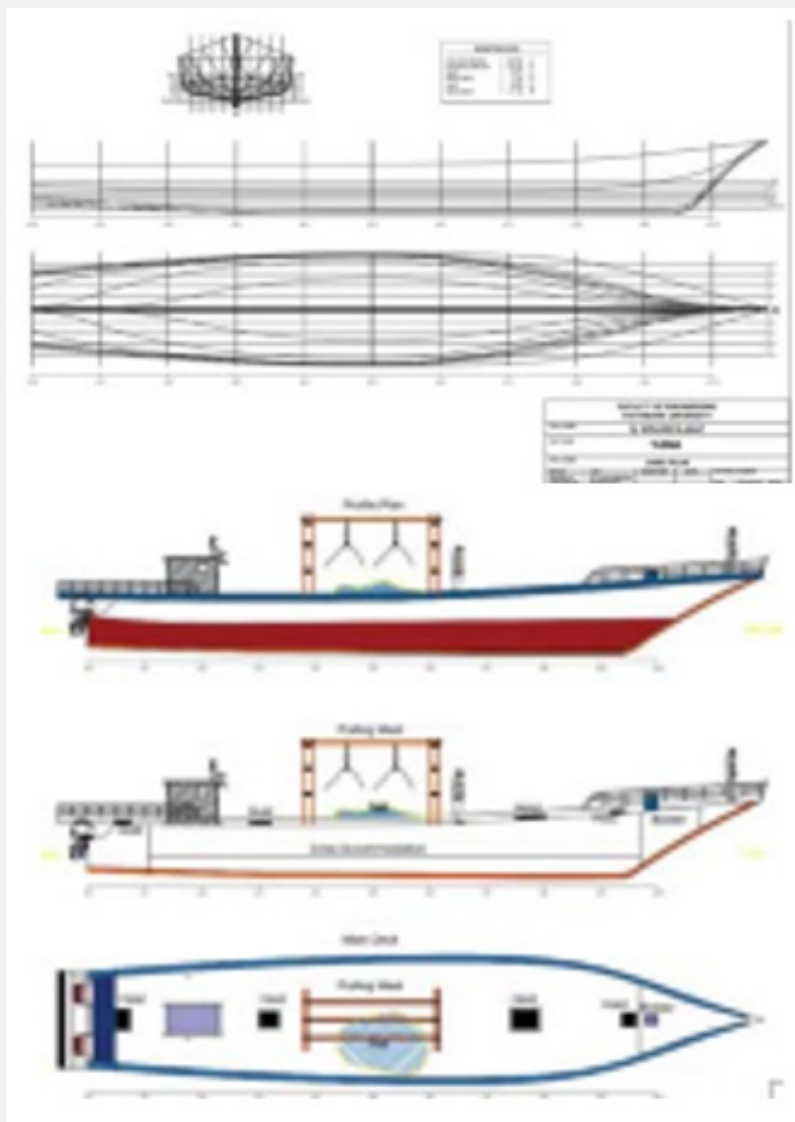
Lines Plan and General Arrangement of Purse Seiner “Yana”.
